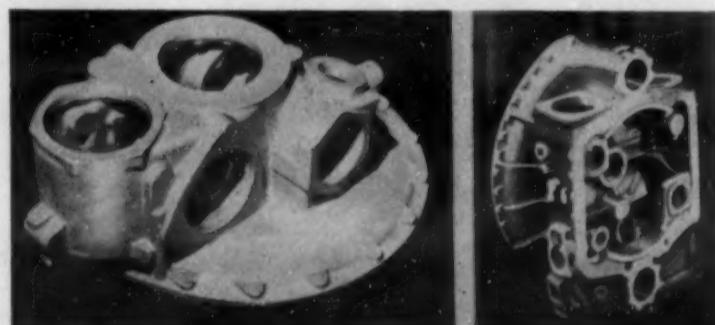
Sand casting for crankcase and top cover for the De Havilland "Gipsy Minor" engine.
